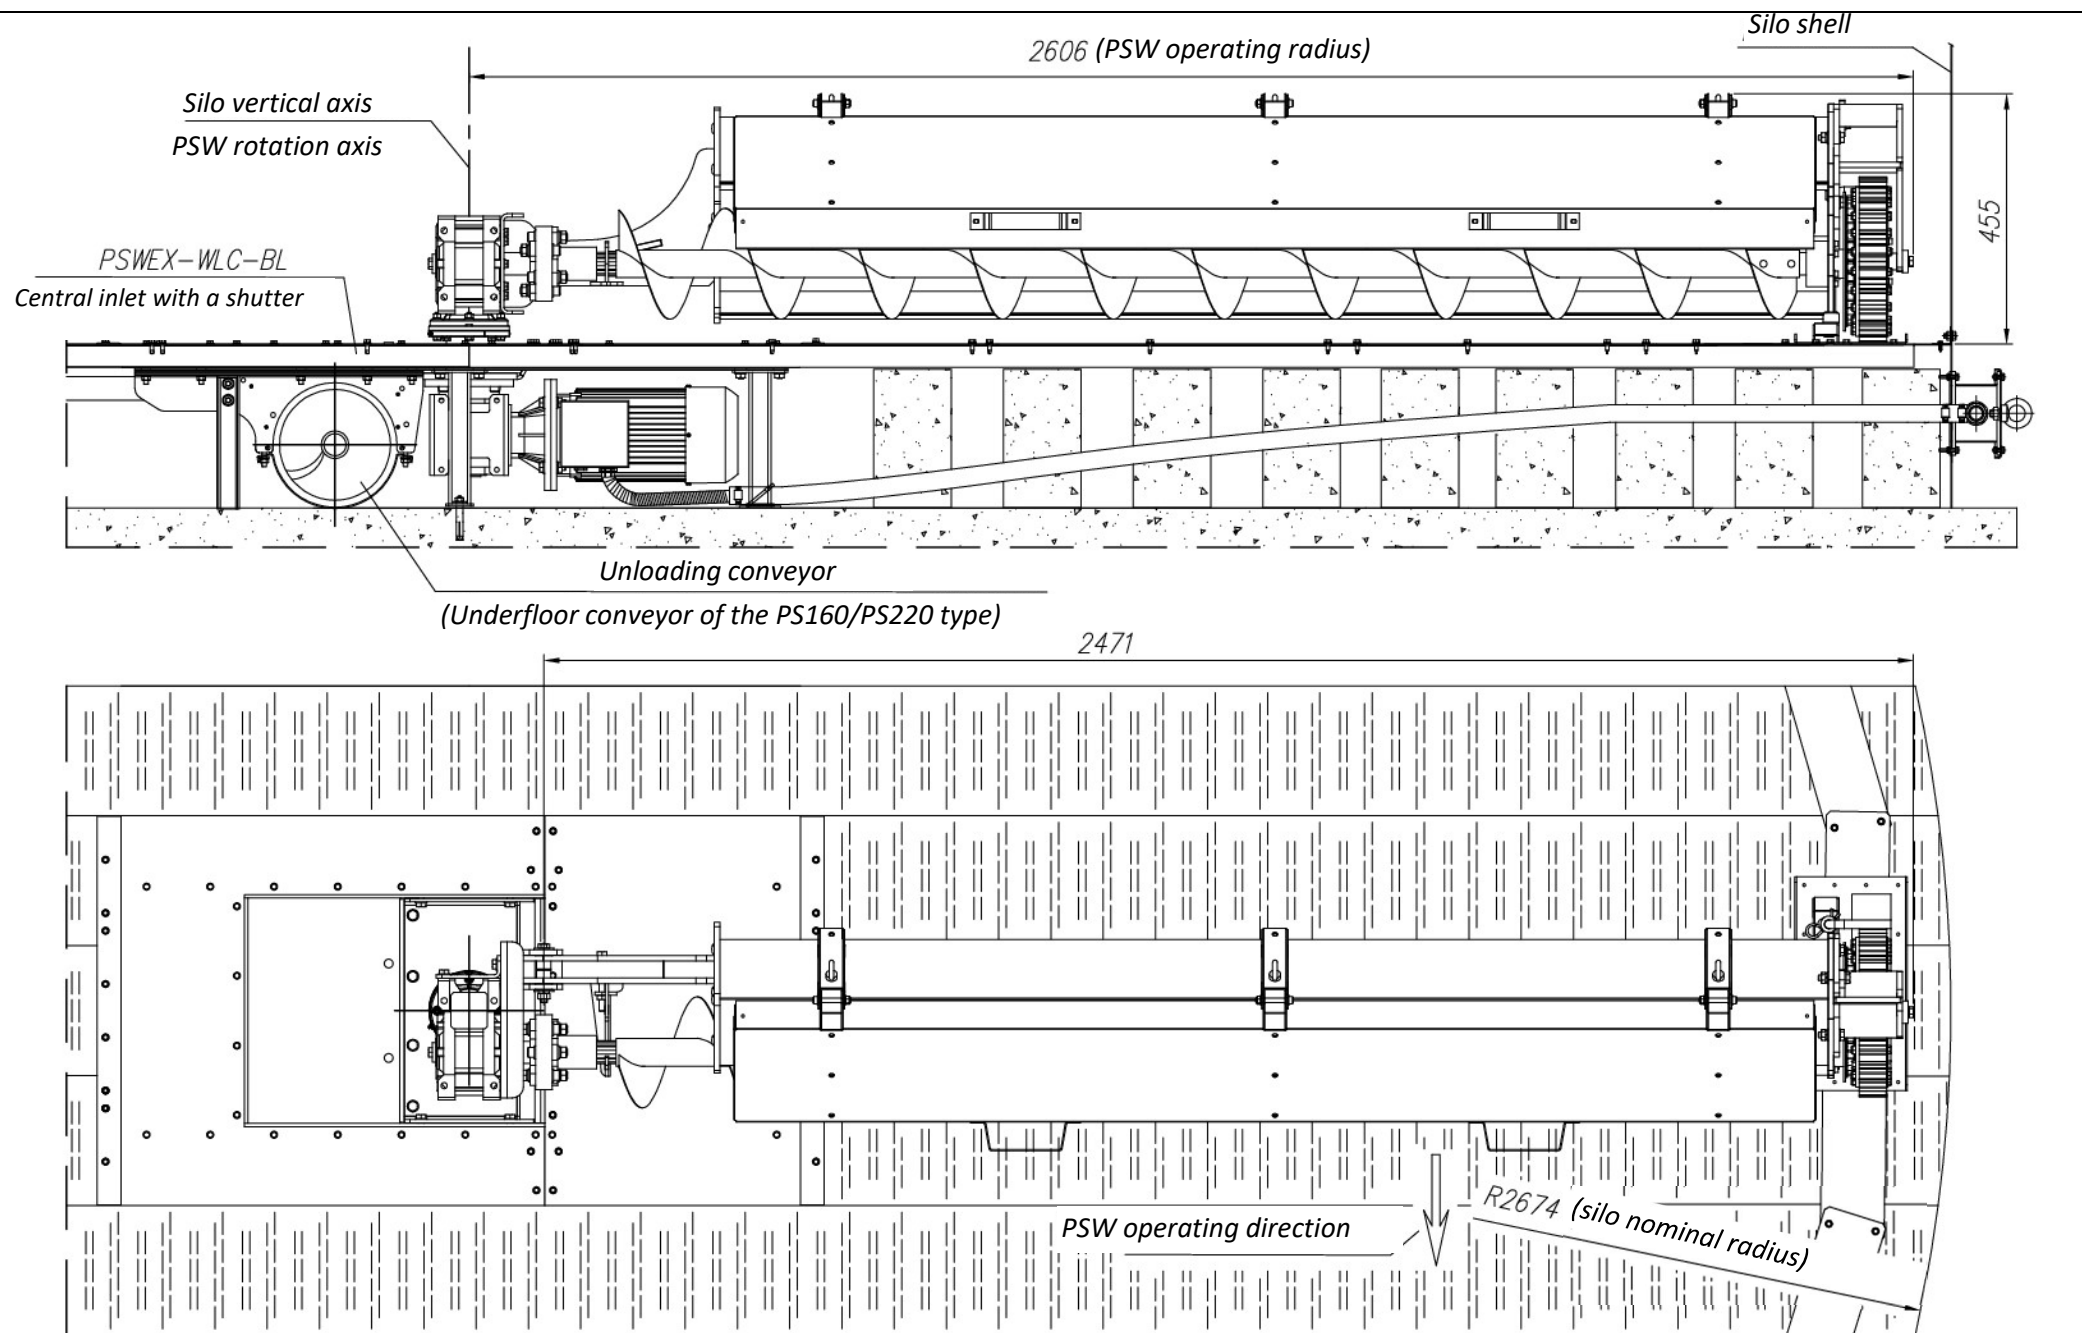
Basic installation dimensions of the internal screw conveyor, of the PSWEX-6 type (dimensions as mm).
